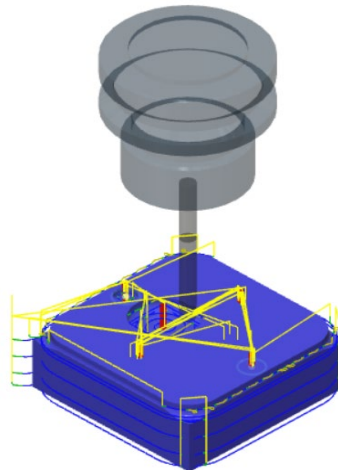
Adaptive Clearing: 1/4" Ball End Mill
